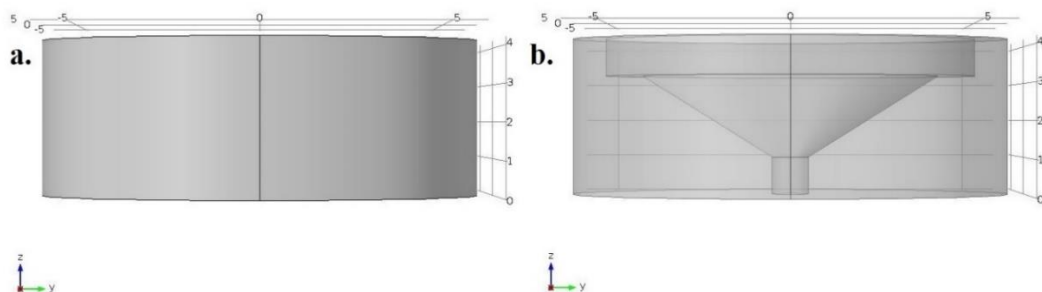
Schematic illustrations of front view of lower spinneret part of prototype 8, (a. solid view, b. transparent view)
